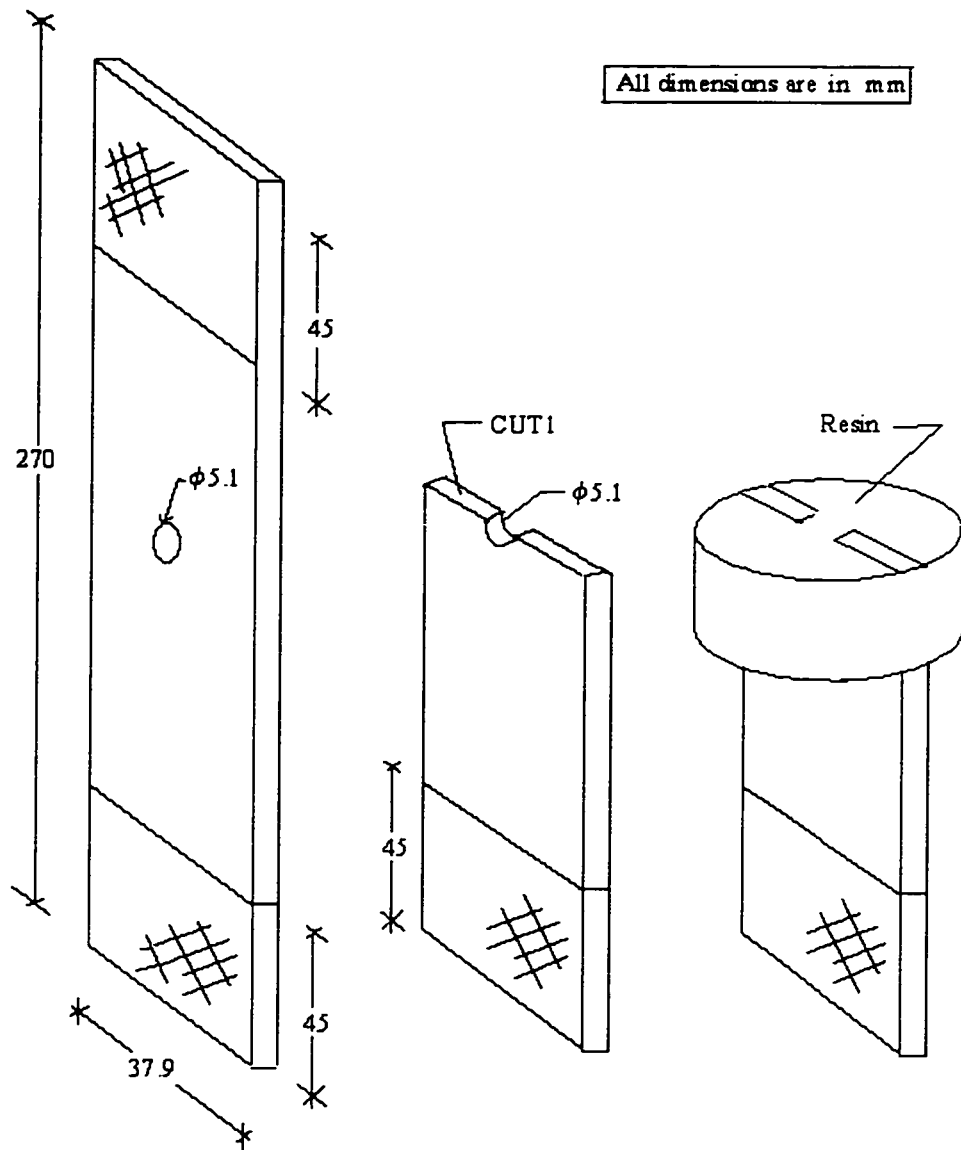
Sketch showing a section taken at the hole region of the specimen and a resin block covering the cut out region
